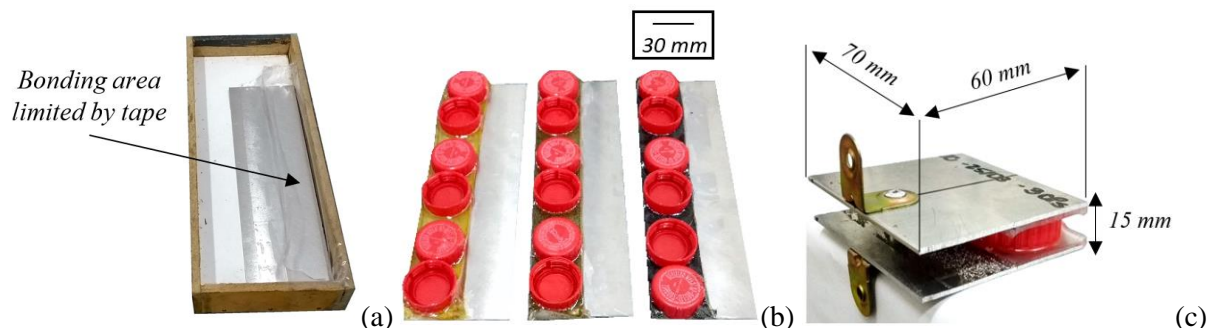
Manufacturing mould (a), caps attached to first skin (b) and manufactured T-peel sample (c).
